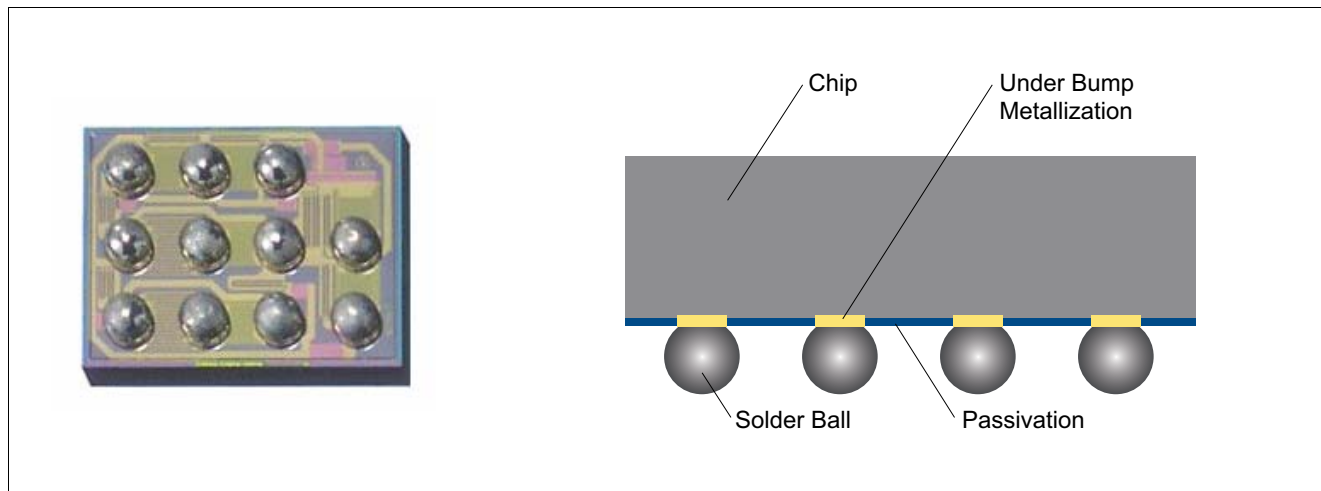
Photo and Schematic Cross Section of Typical SG-WLP
